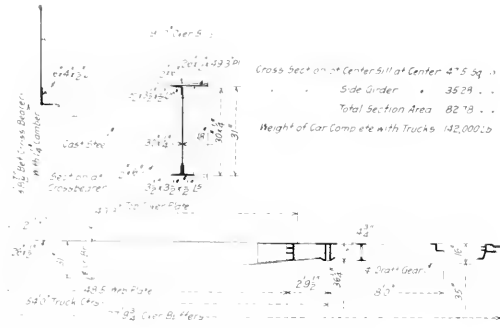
Underframe with Deep Center Sills and Light Side Girders
